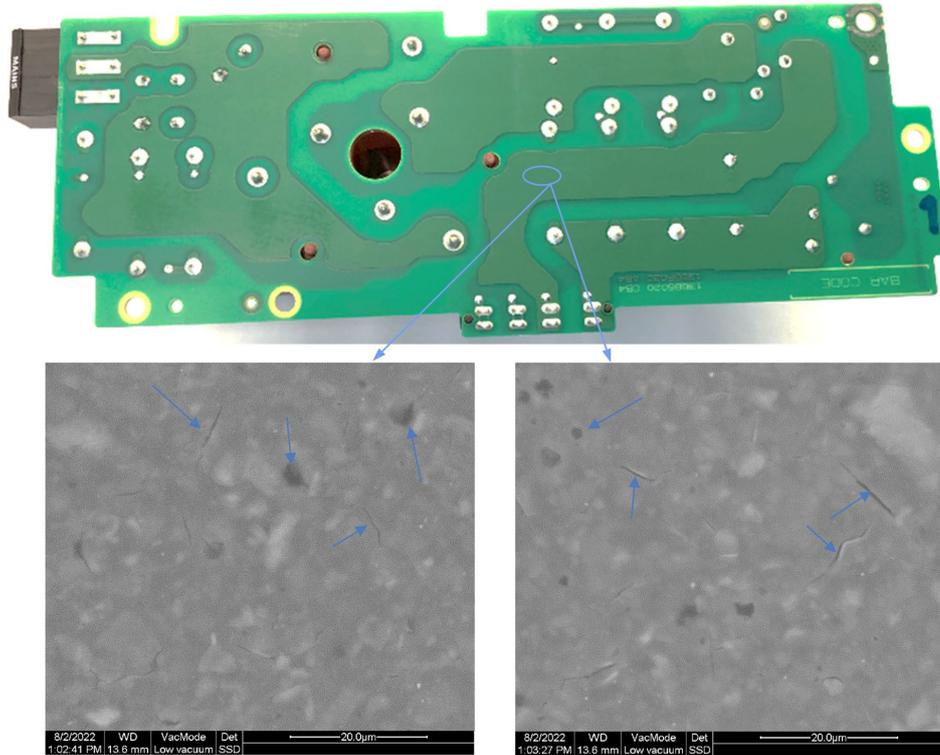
PCBA under test (backside view) with close-up on solder mask with small cracks and pinholes.
